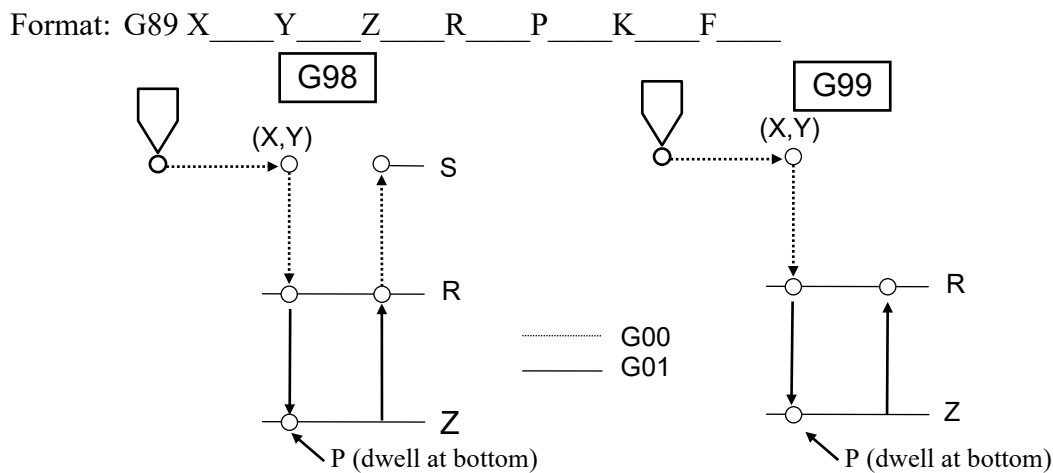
G89 Boring Canned Cycle with Spindle Dwell at Hole Bottom
